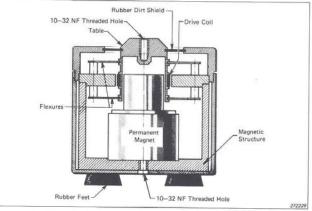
Sectional drawing of the Mini-Shaker Type 4810
